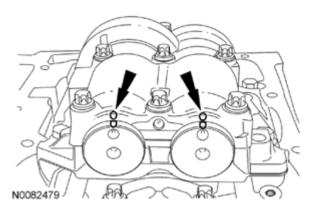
Locating Balancer Unit And Shafts Marking Courtesy of FORD MOTOR CO.
